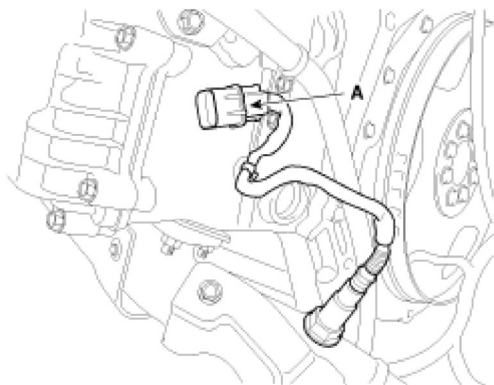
Identifying Oxygen Sensor Connector Bracket
